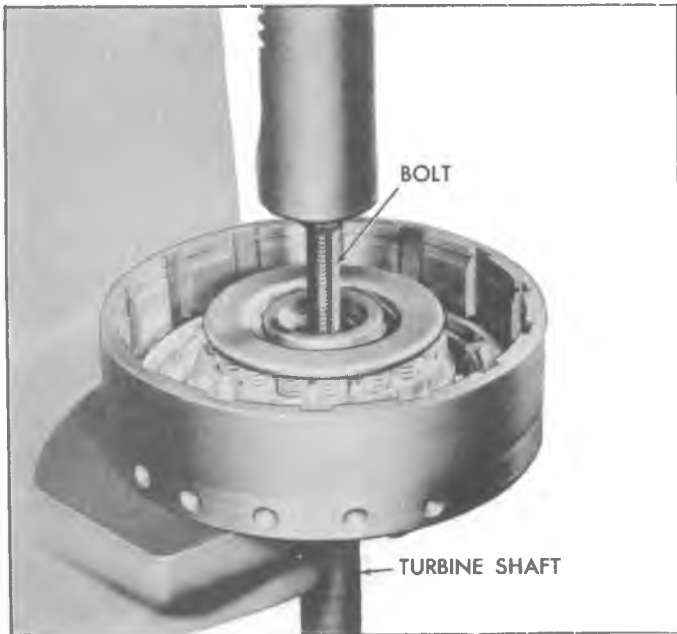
T—Removing Turbine Shaft from Forward Clutch Housing
